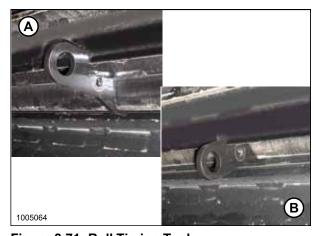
Roll Timing Tool A - Start Position B - Gauge Position
